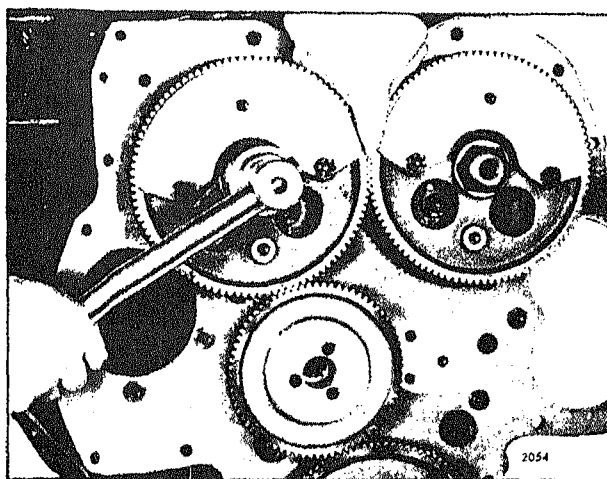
Removing or Installing Nut on Camshaft or Balance Shaft
